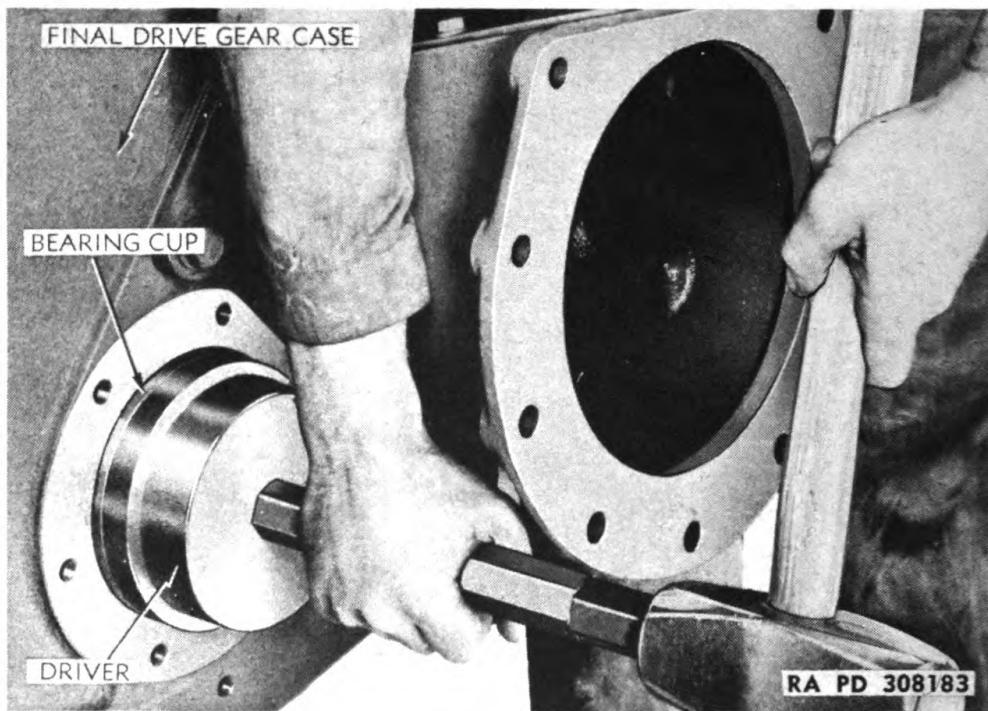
Installing Sprocket Shaft Outer Bearing Cup, Using Replacer (41-R-2374-875)
